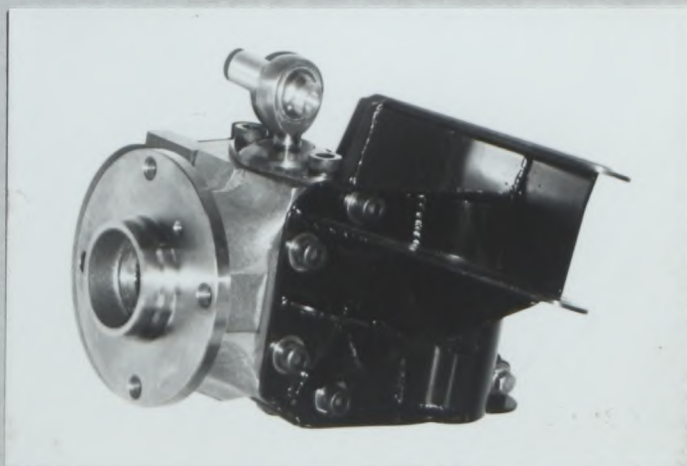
REINFORCED FRONT ARM TYPE B
